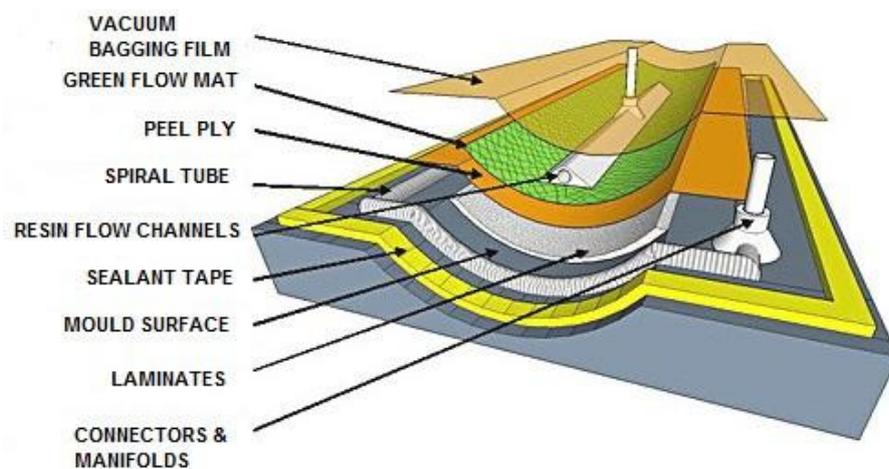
Vacuum Assisted Resin Transfer Molding (VARTM) process
